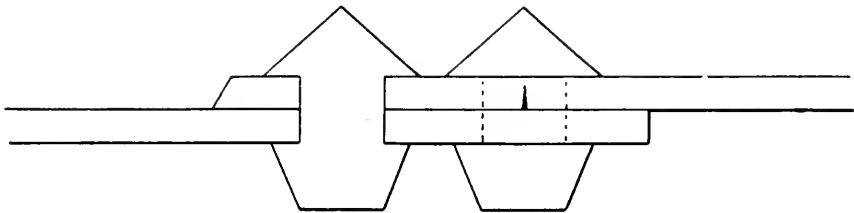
A HIDDEN CRACK PASSING THROUGH THE RIVET HOLES.
